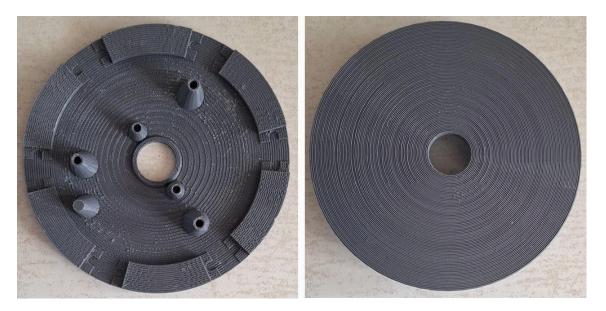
3D printed model of PTC based hot plate. Bottom view (left) and top view (right)
